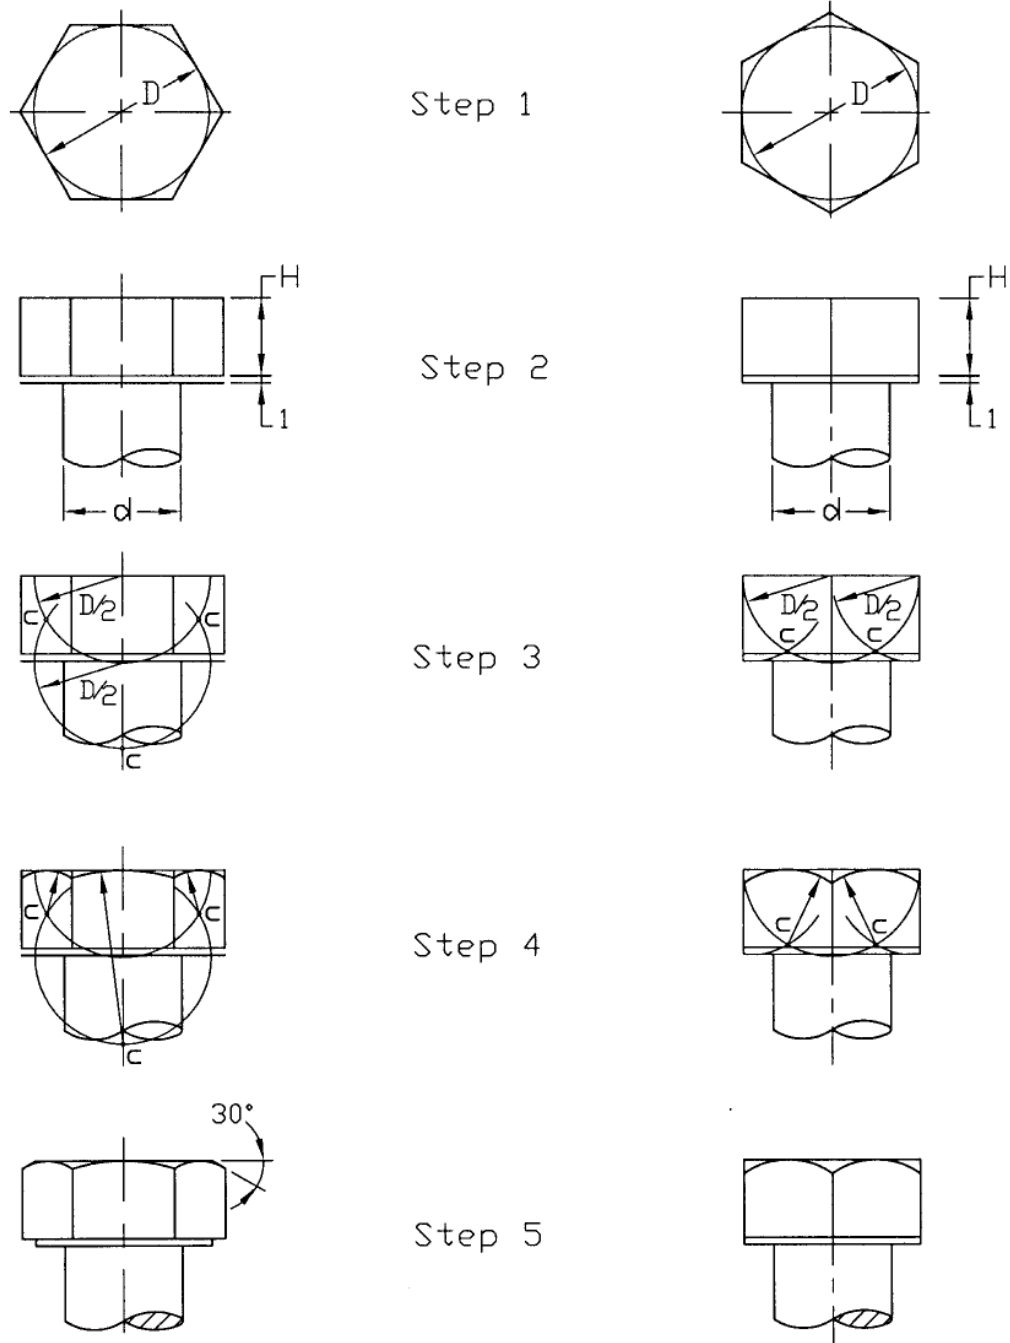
Steps in Drawing Hexagonal Bolt head
